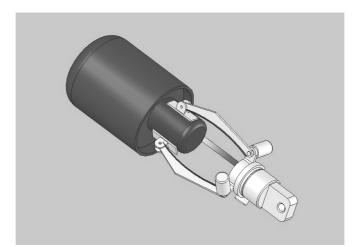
Removing the triggering mechanism of an unexploded bomb.
